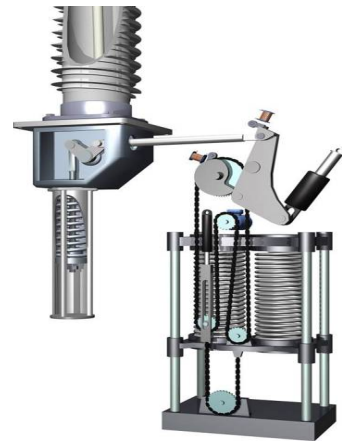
Spring drive operating mechanism for circuit breakers (ABB Image Bank)
